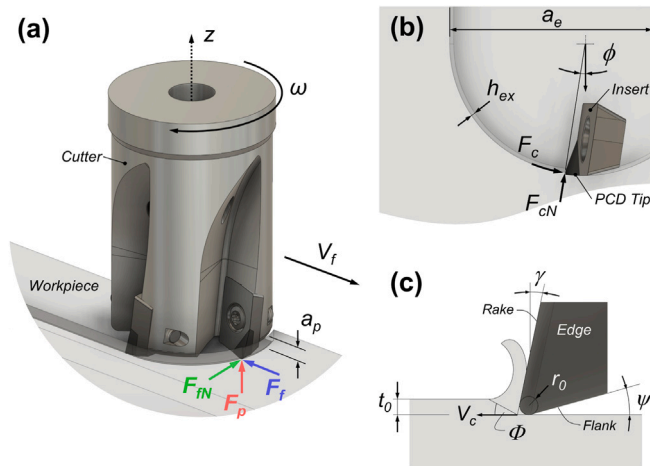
Schematics illustrating the square shoulder climb milling process used for the cutting tool trials: (a) Shows the Seco Tools Turbo-10 cutter engaged in the workpiece material with annotations given for the principle cutting force directions, (b) a schematic in the plane normal to the spindle axis showing the PCD tipped insert highlighting the F_c and F_{cN} cutting force directions, and (c) the cutting edge with annotated microgeometry features.
